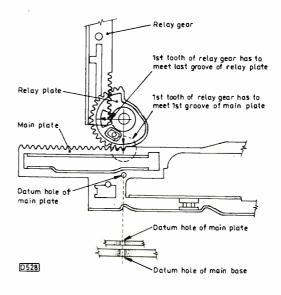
Datum positions of the main plate and relay gear.
